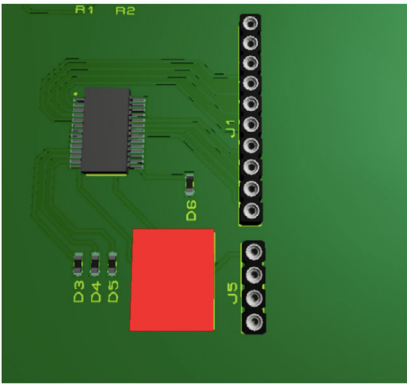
Design of Control 3D PCB in Proteus 8.12.
